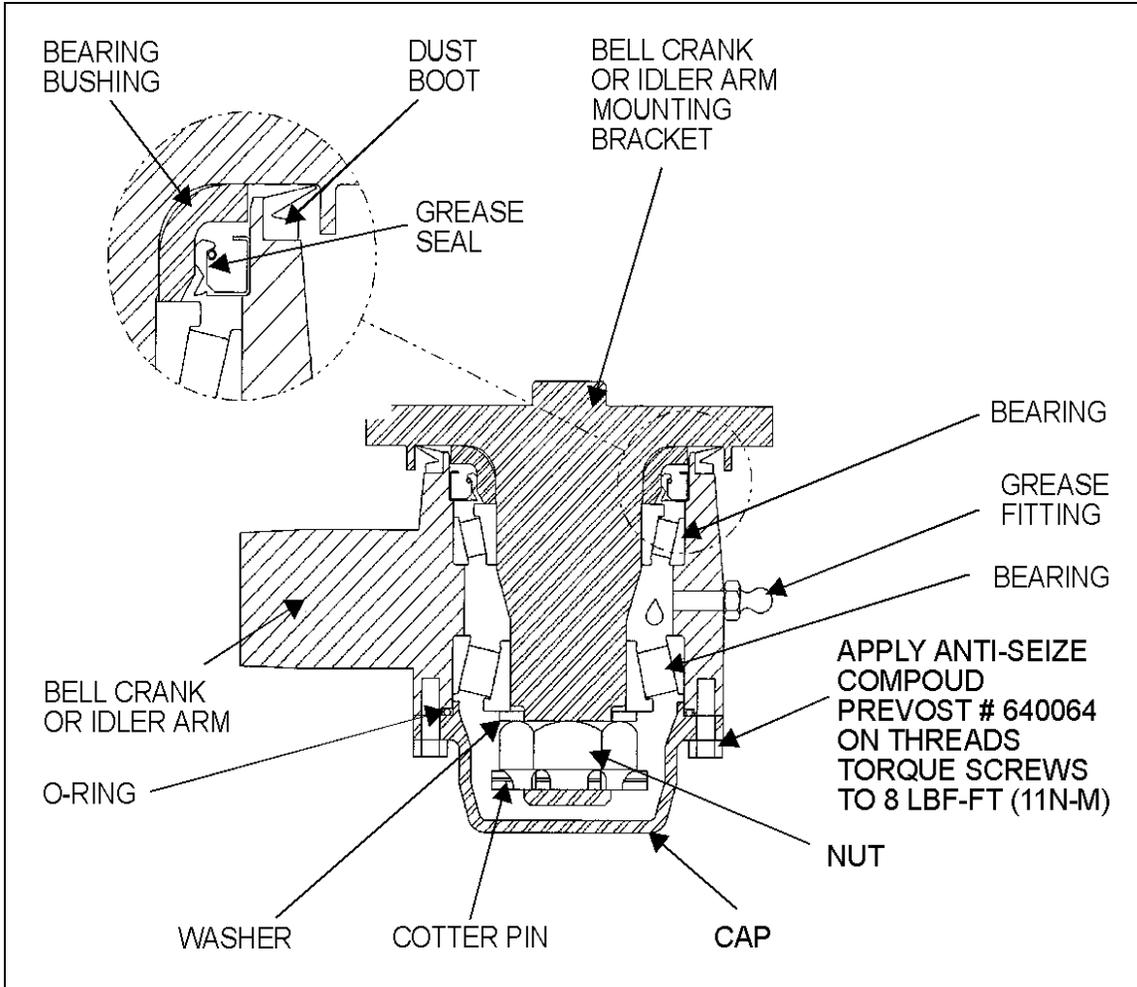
BELL CRANK AND IDLER ARM BALL JOINT
